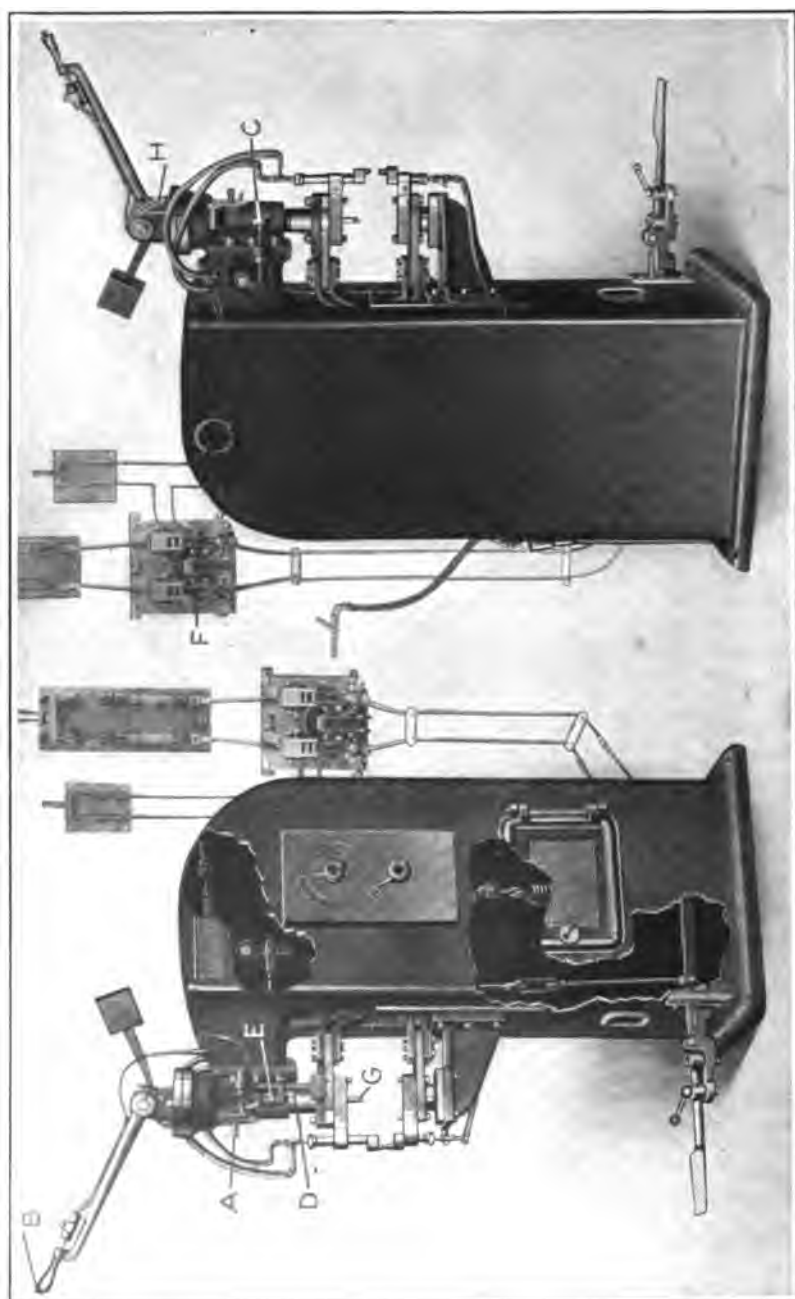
Common Type of Electric Spot-welding Machine sectioned in Certain Places to show Constructional Features
